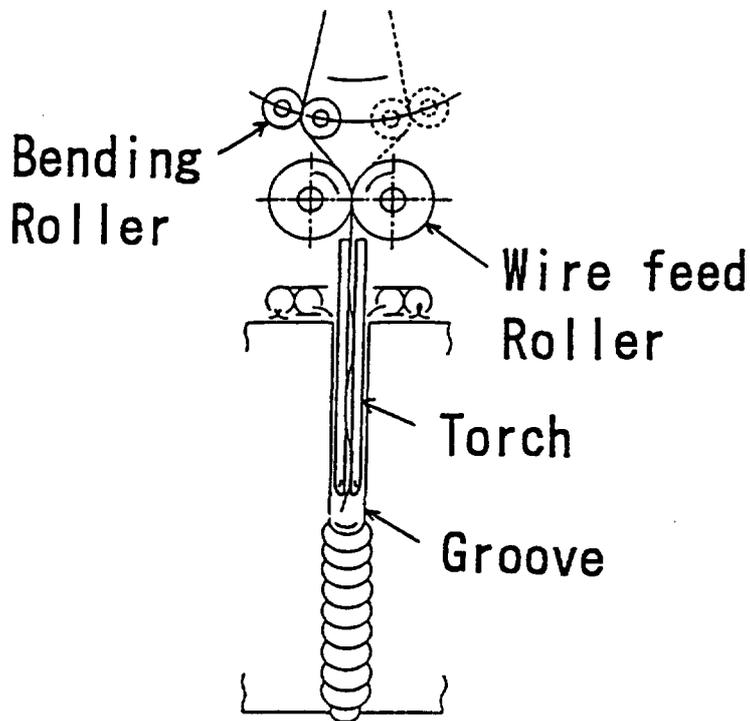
Mechanism of automatic narrow-gap MIG welding
